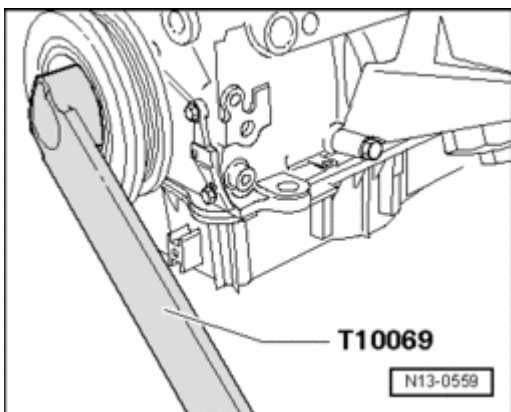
Loosening/Tightening Securing Bolt, Using Counter-Holder T10069 To Hold Vibration Damper
